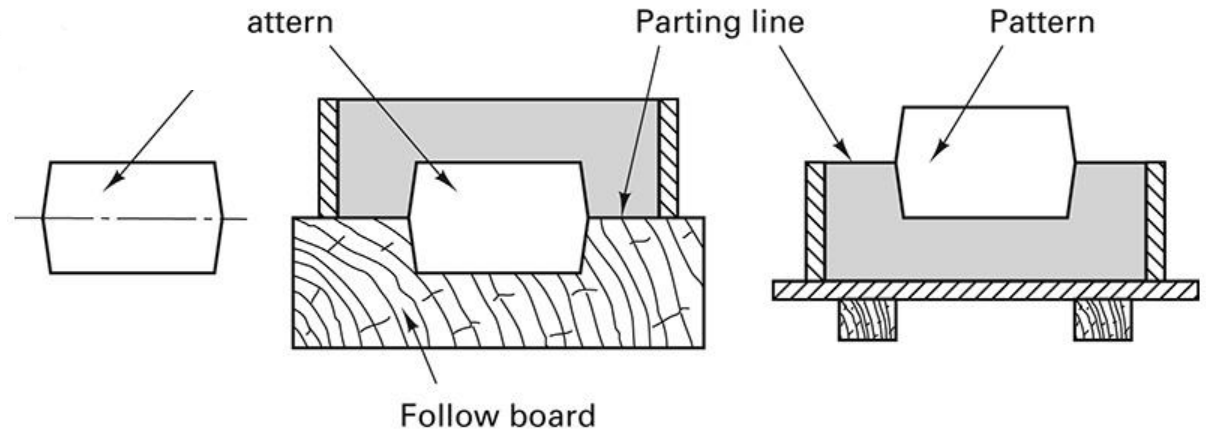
(Below) Method of using a follow board to position a single-piece pattern and locate a parting surface. The final figure shows the flask of the previous operation (the drag segment) inverted in preparation for construction of the upper portion of the mold (cope segment).
